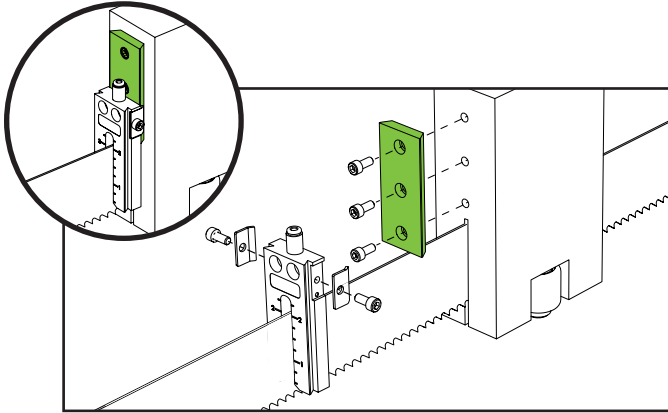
Mounting the Band Saw Blade Nozzle to the guide block using rail mount option
